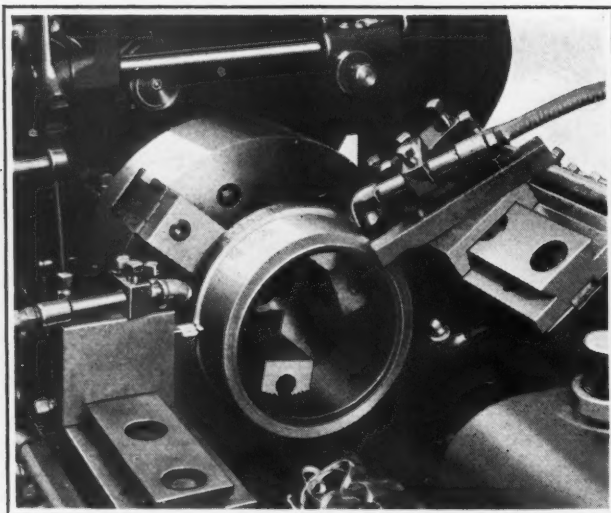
Removing Sixteen and a half Pounds of Metal from Nut Forging in Three Minutes
